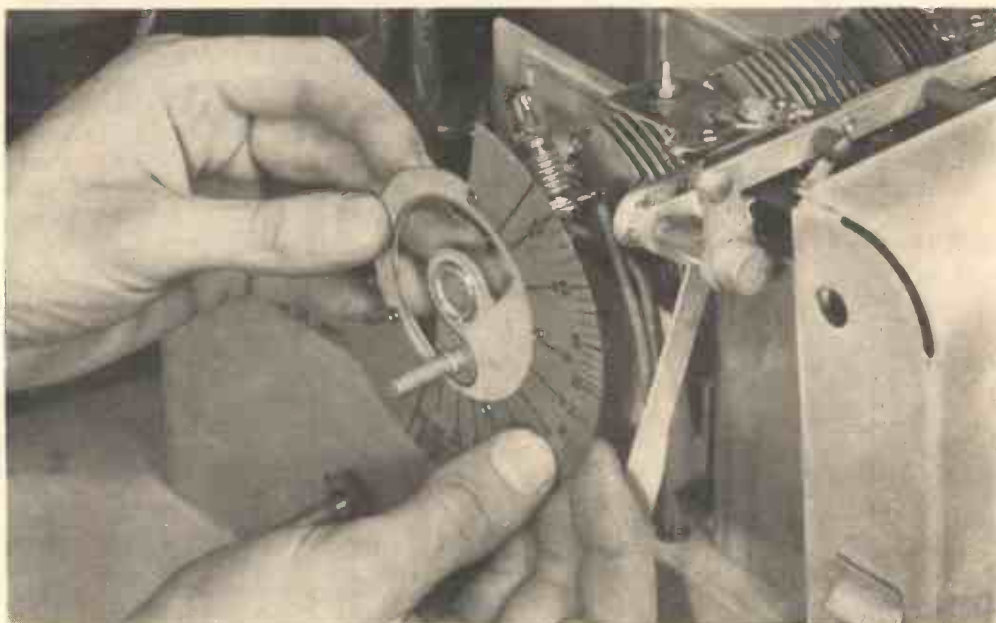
WITHDRAWING THE DIAL DRIVE ASSEMBLY.
